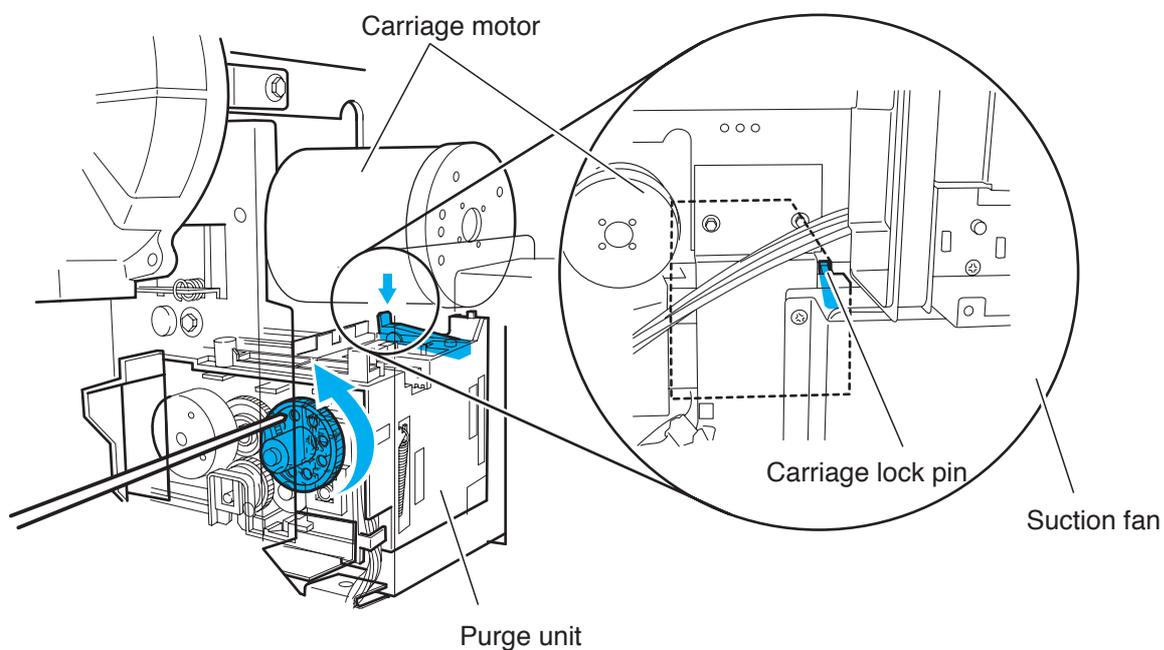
Opening the Caps and Releasing the Carriage Lock Pins
